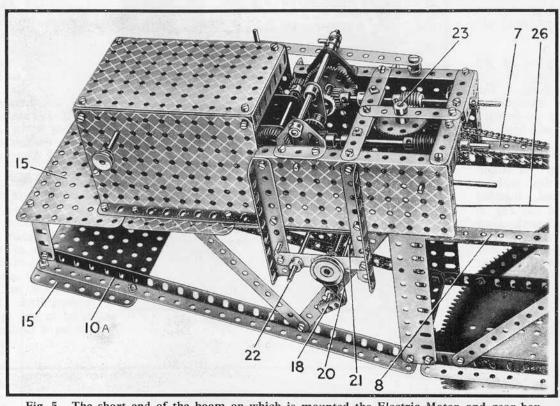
The short end of the boom on which is mounted the Electric Motor and gear-box.
